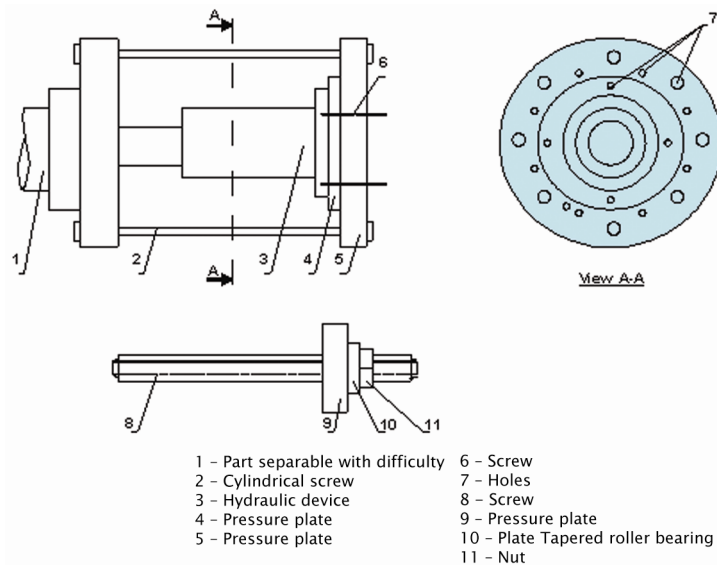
Device for mounting and removing hard-to-separate components of mechanical constructions in mechanical systems
